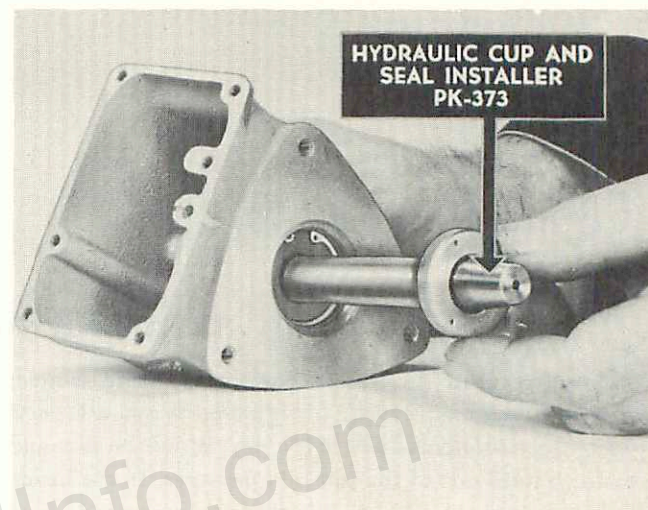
Lip of Seal Must Be Toward Hydraulic Cylinder
